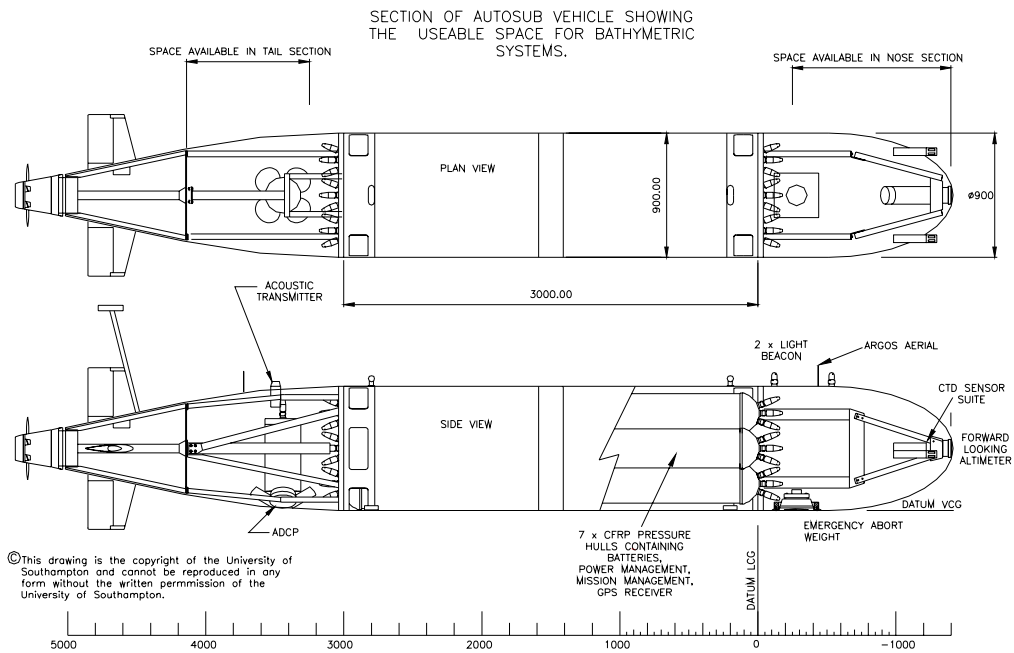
Vehicle layout showing sensor space and datum.
